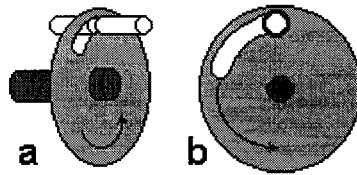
Open disk valve in oblique (a) and frontal (b) view.
